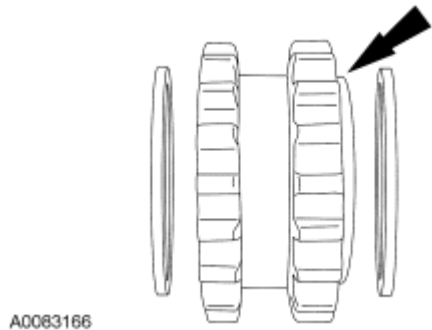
Locating Washers, Oil Pump Chain & Sprockets
